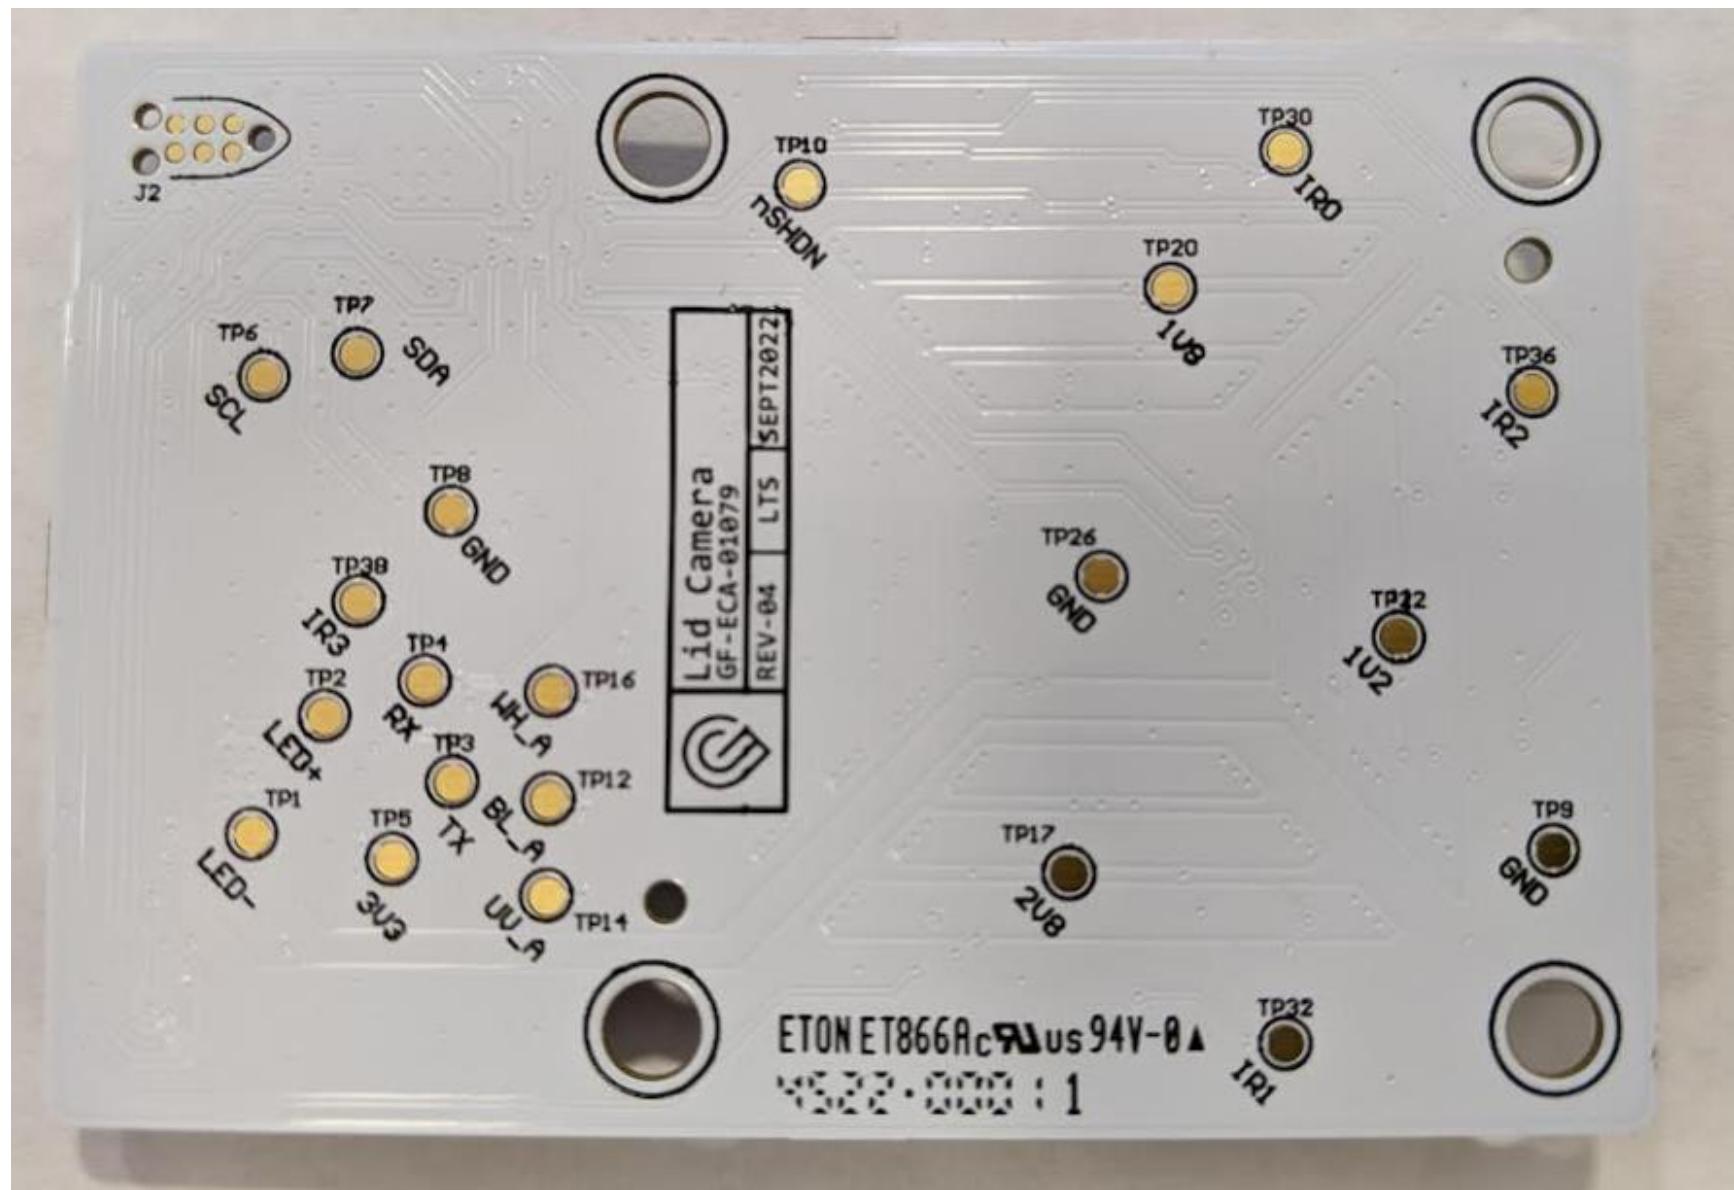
GF-PCA-00154- Lid PCBA-Bottom
